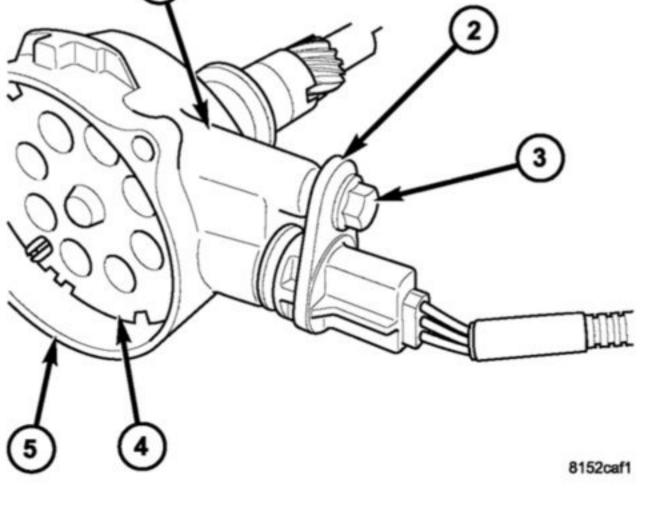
4.0L CMP REMOVAL/INSTALLATION
